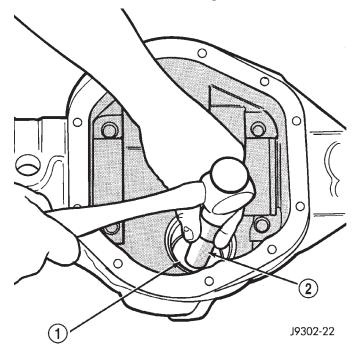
Front Bearing Cup Removal 1 – REMOVER 2 – HANDLE
